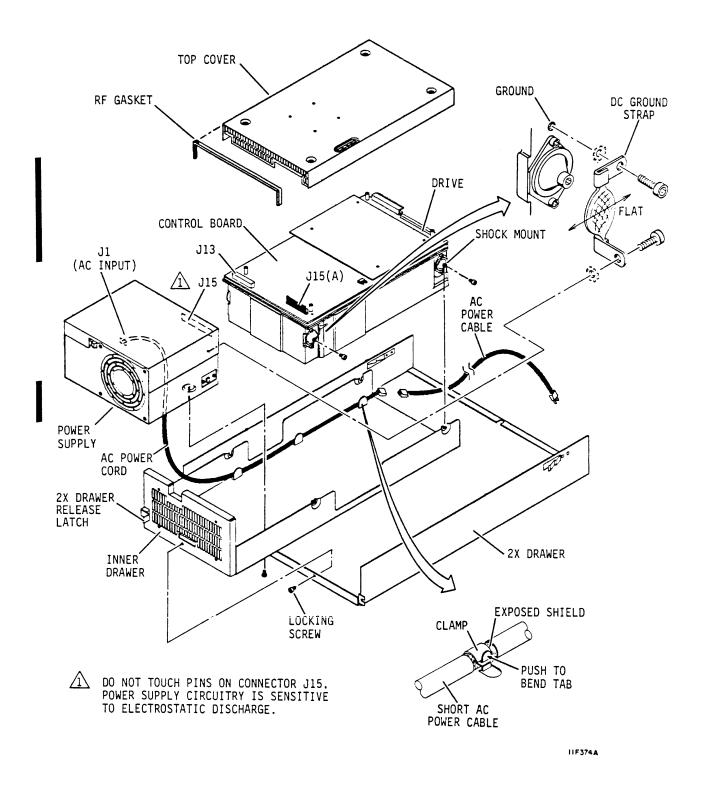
Mounting Drive and Power Supply in 2X Drawer
